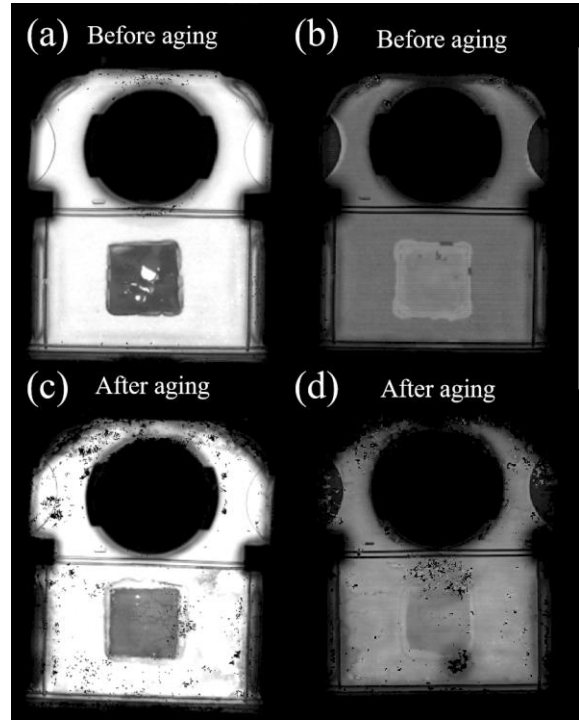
CSAM analysis of die attach layers: comparison before aging (a) EMC+solder, (b) EMC+Ag and after aging (c) EMC+solder, (d) EMC+Ag.
